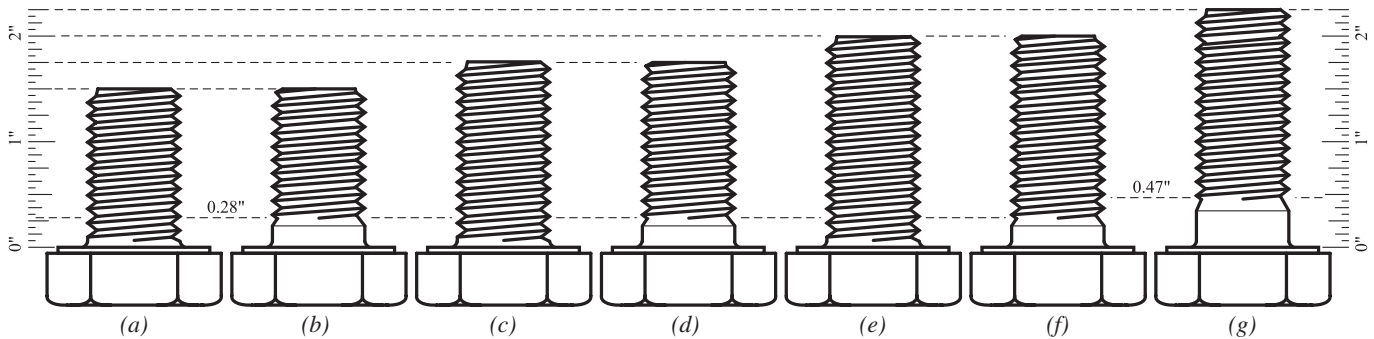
Conforming variants of 7/8-in.-9×1½-in., 7/8-in.-9×1¾-in., 7/8-in.-9×2-in., and 7/8-in.-9×2¼-in. bolts.
